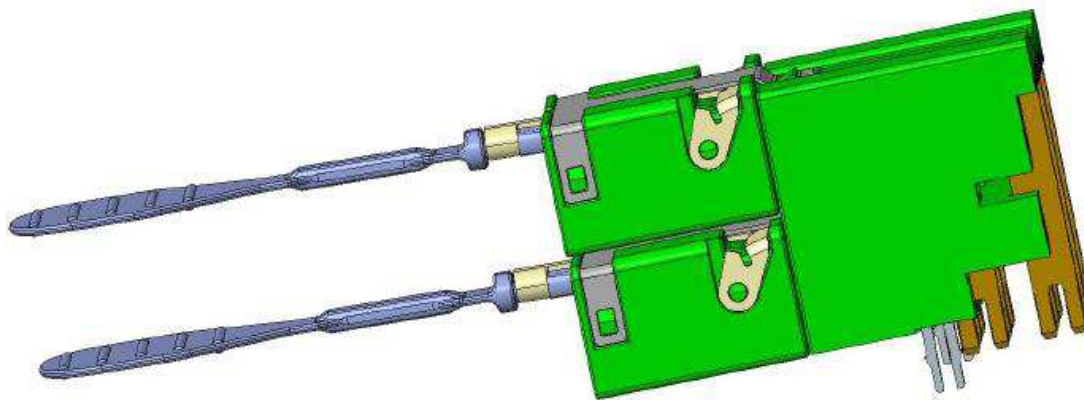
, illustration of stack board connector 2204535-x and 2 cable connector 2204534-x
